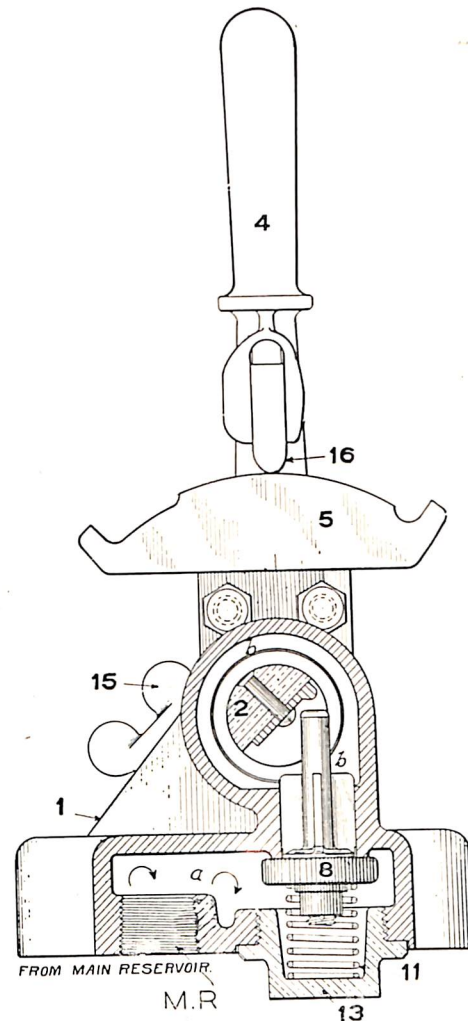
Cross Section of S-3 Straight-Air Brake Valve in Lap Position
